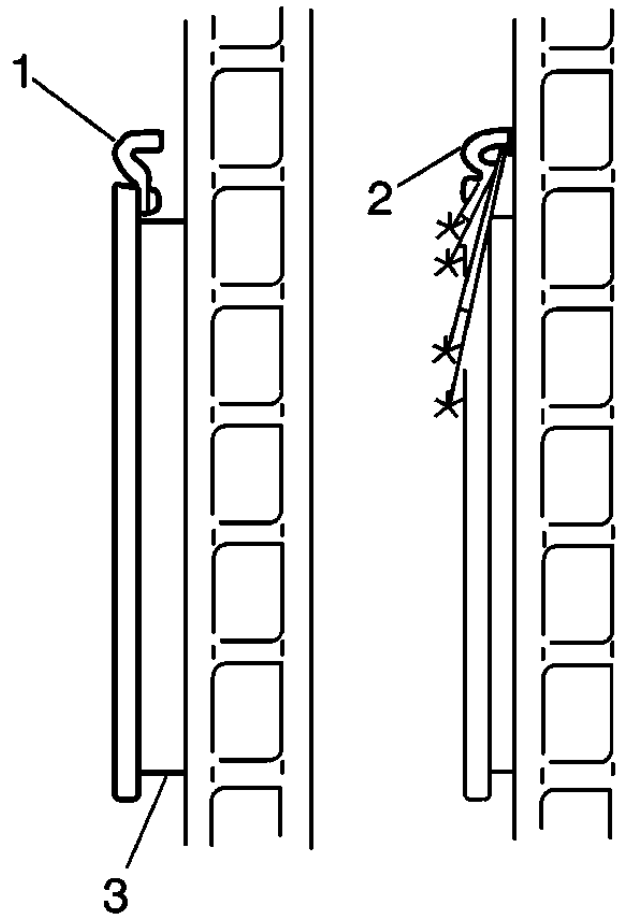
View Of Brake Pads & Audible Wear Sensors
